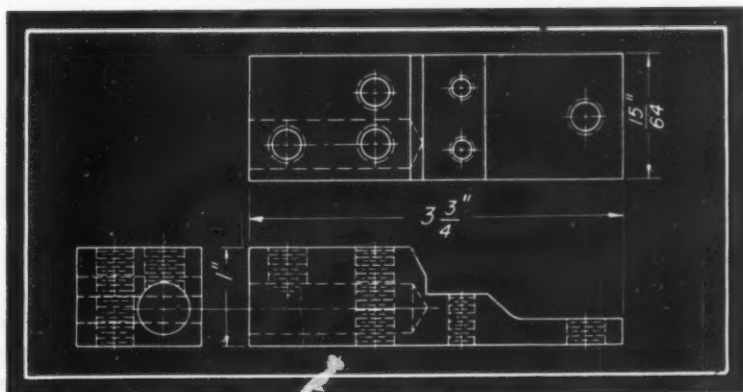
Right—Production of this contact part from special-shape bar reduced costs
